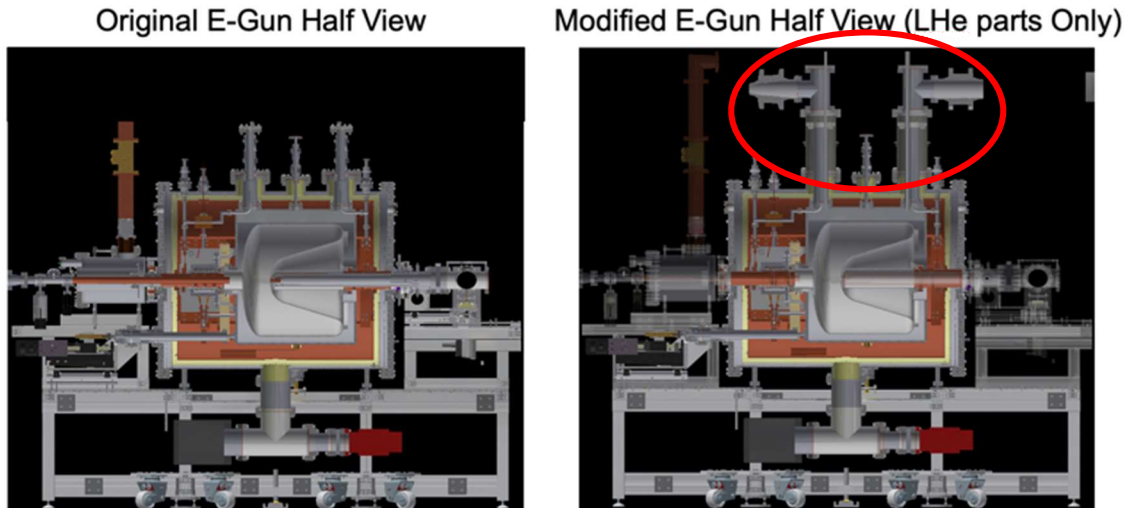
Model section views of the cryogenic interface modifications. Each of the two new large stacks above the cavity (circled in red) is an integrated helium bayonet connection and ASME burst disc assembly.
